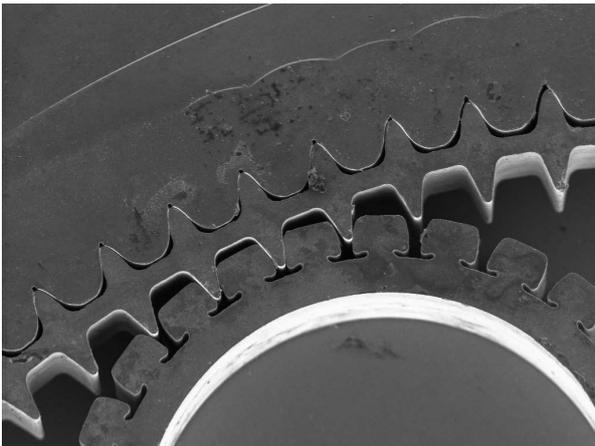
Focus on tooth engagement area of an assembled Micro Harmonic Drive gear rack (SEM).
